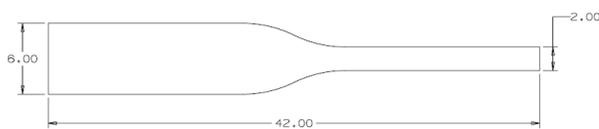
Geometry of the flat fatigue sample, dimensions in mm.
